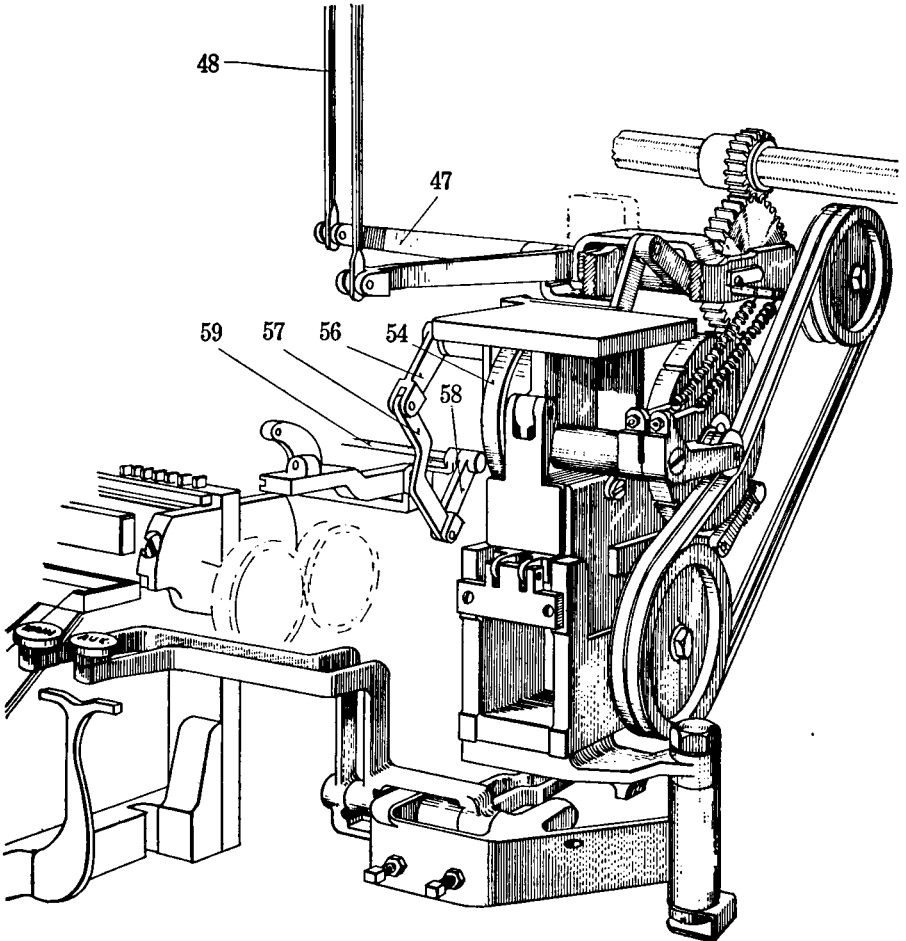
Enlarged view of a portion of Fig. 4-25.
